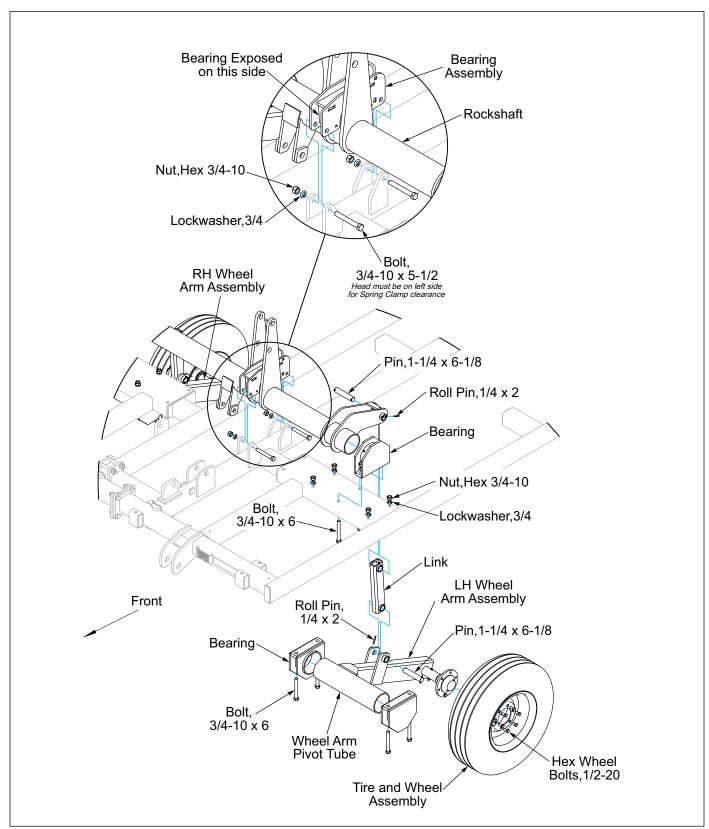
Single Wheel Transport Axle Assembly 7 and 9 Shank Models
